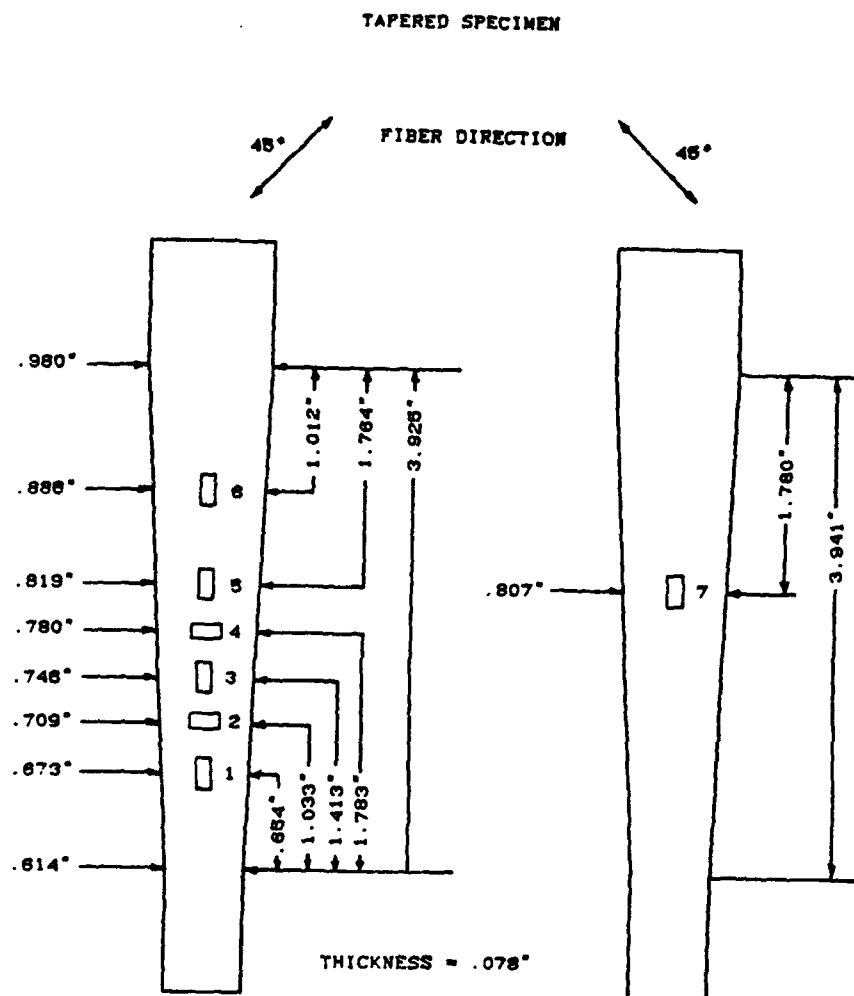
Schematic of the tapered specimen with dimensions and strain gage locations. The specimen was cut using electric discharge machining.
